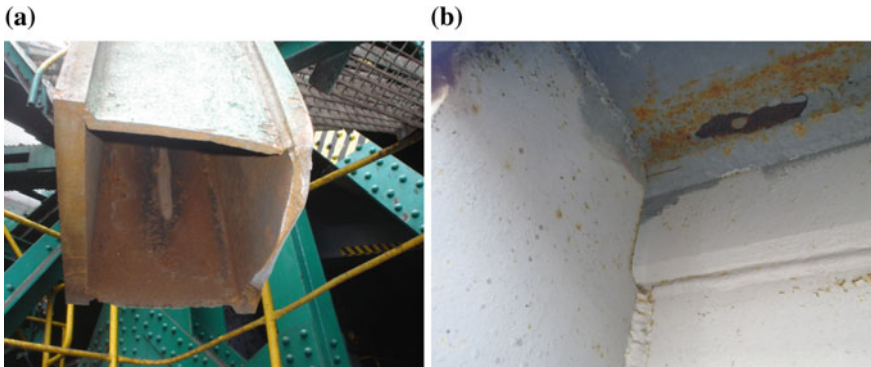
Examples of damage to counterweight booms: a fatigue cracks of the counterweight boom tie rod [13]; b fracture of the top girder of the main counterweight boom on a bucket-wheel excavator
